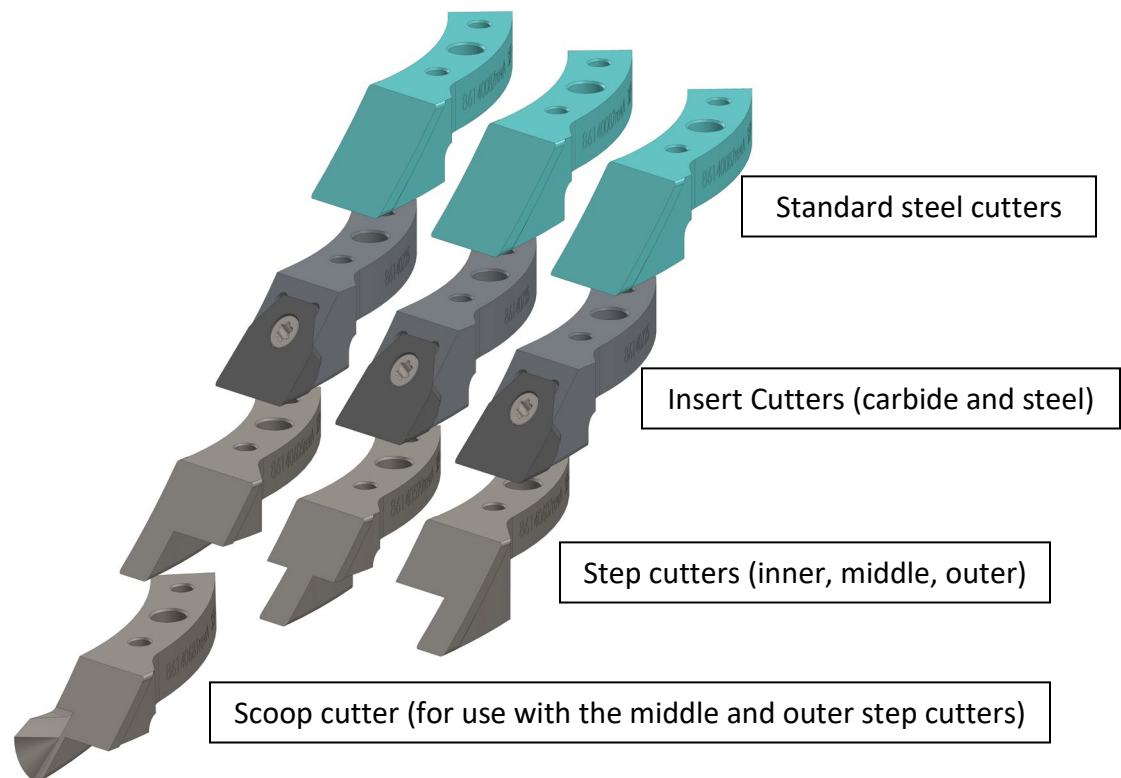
Cutter types for the Foro 3000 Drill. From top to bottom, standard steel cutters, insert cutters, step cutters, scoop cutter for use with middle and outer set cutters.
